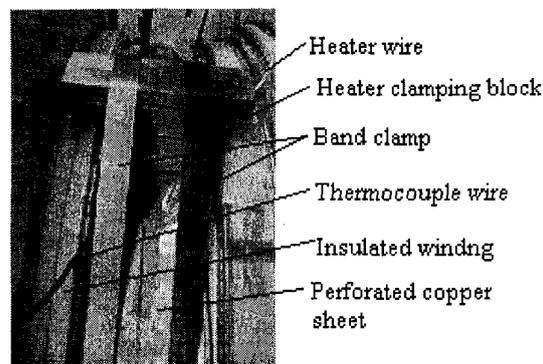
Inner perforated copper sheet clamped with heater block for solder lap joint with stainless steel band clamps
